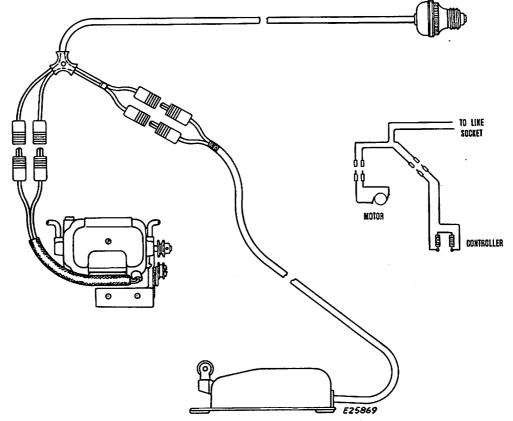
Wiring Diagram for BU207 Motor on 24-63 Machine with Foot Control
